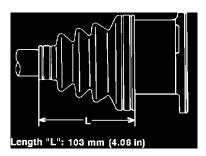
Driveshaft inner boot installation. Pathfinder & 4WD Pickup
